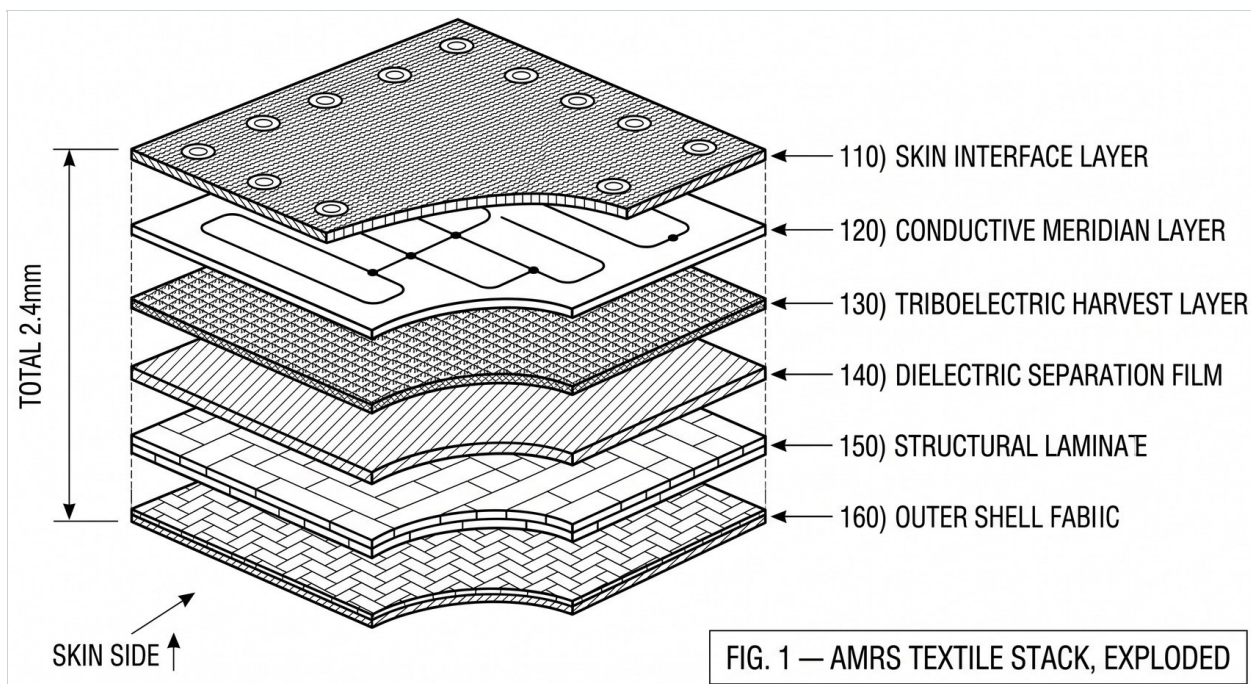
AMRS TEXTILE STACK, EXPLODED
